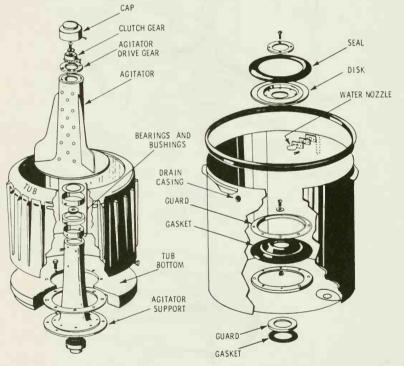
The tub and collector-tank assemblies of an agitator-type washing machine.
